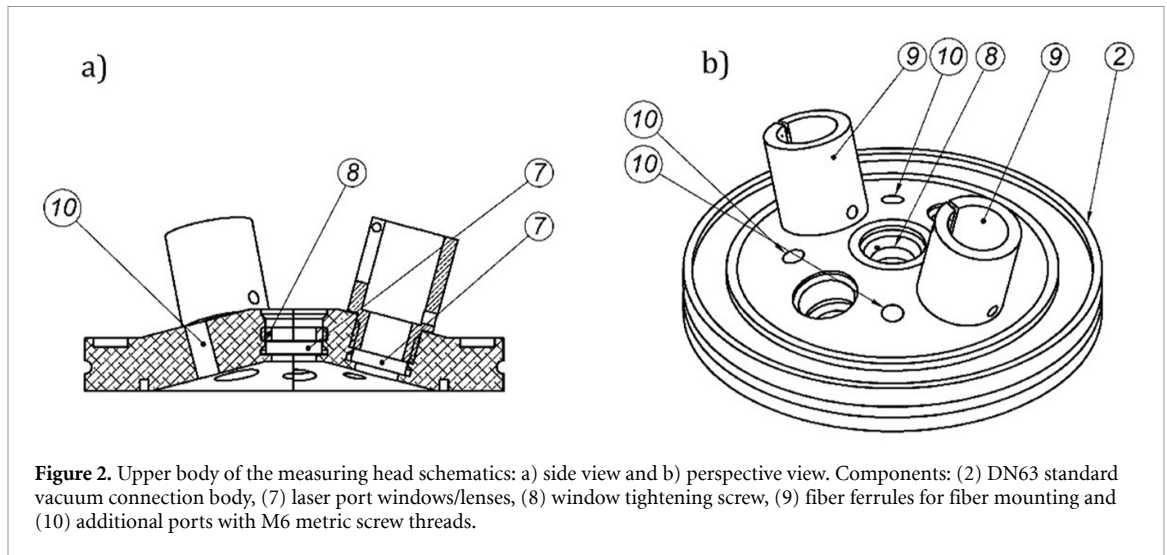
Upper body of the measuring head schematics: a) side view and b) perspective view. Components: (2) DN63 standard vacuum connection body, (7) laser port windows/lenses, (8) window tightening screw, (9) fiber ferrules for fiber mounting and (10) additional ports with M6 metric screw threads.
